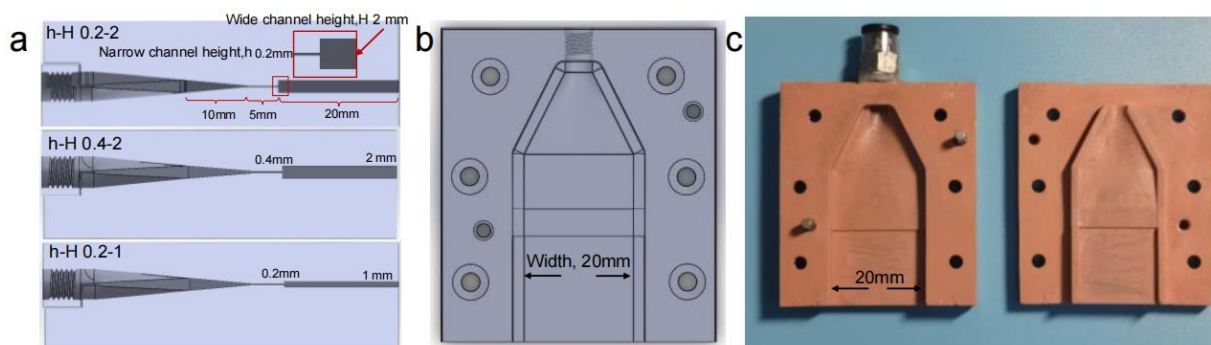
The lateral view (a) and top view (b) of the mold drawing. (c) Photograph of the mold (0.2-2) including positive and negative molds fabricated by the 3D printing technique
